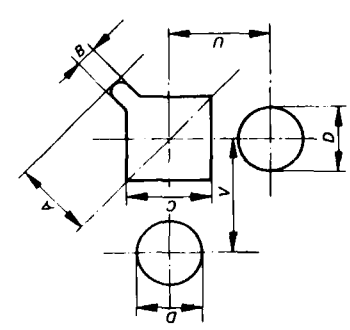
Spindle and drive holes in flange No. 1 (see 4.2.3)
